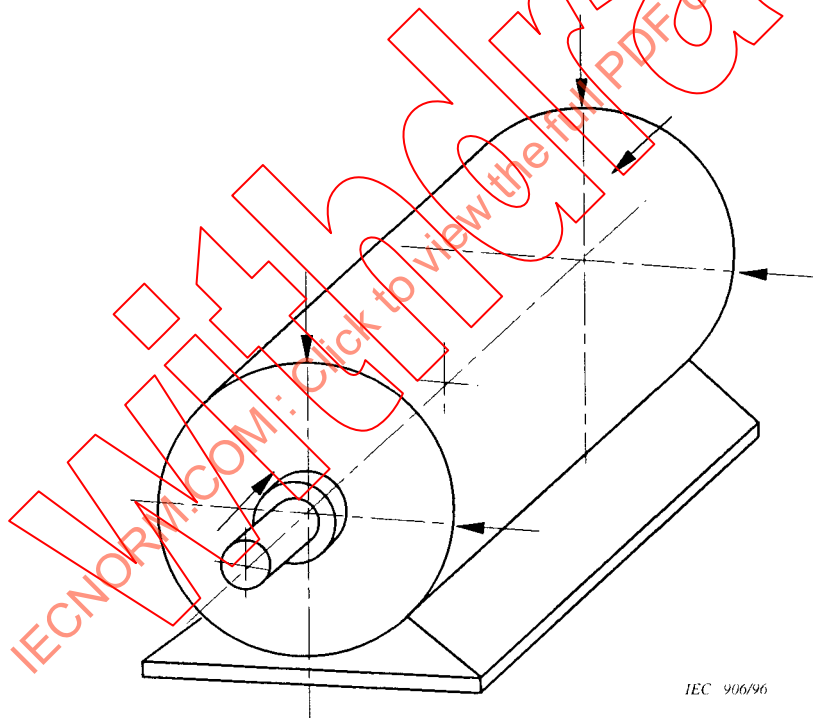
Measurement points for those ends of machines where measurements according to figure 2 are not possible without disassembly of parts
